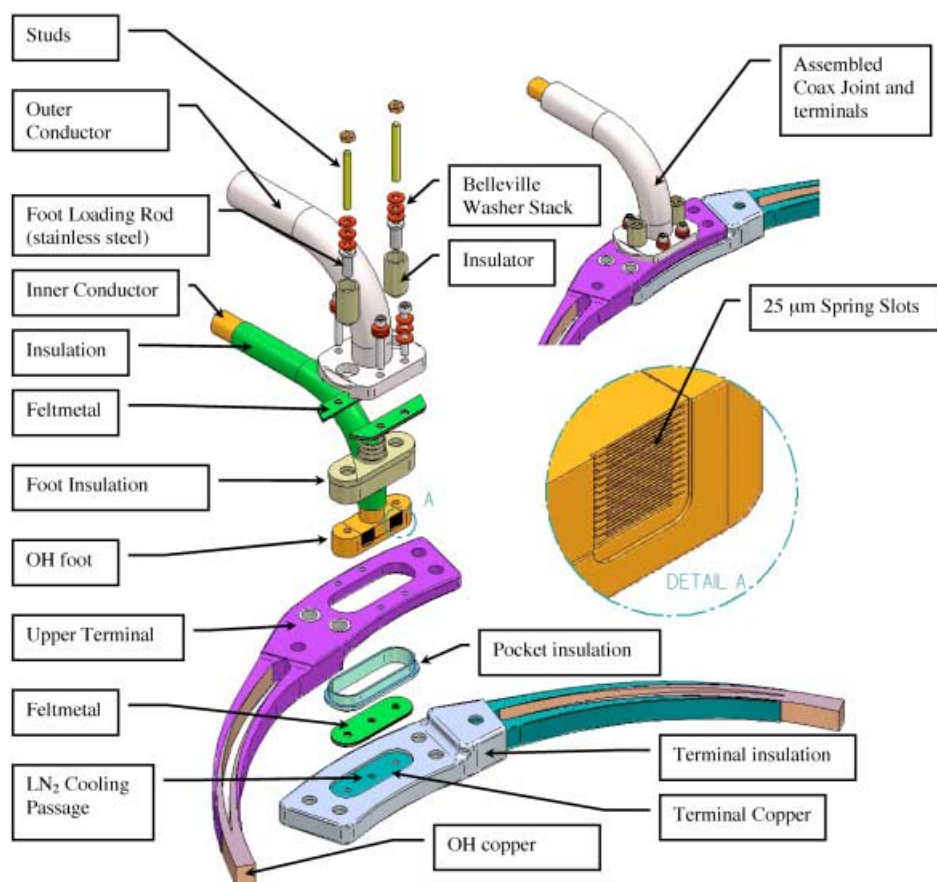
Details of the OH coaxial connection. Feltmetal pads soldered to both sides of a 1.58-mm copper plate provide a low-resistance connection. Slots machined into the center conductor foot provide additional compliance for the joint. All three OH coaxial connections are of the same design.
